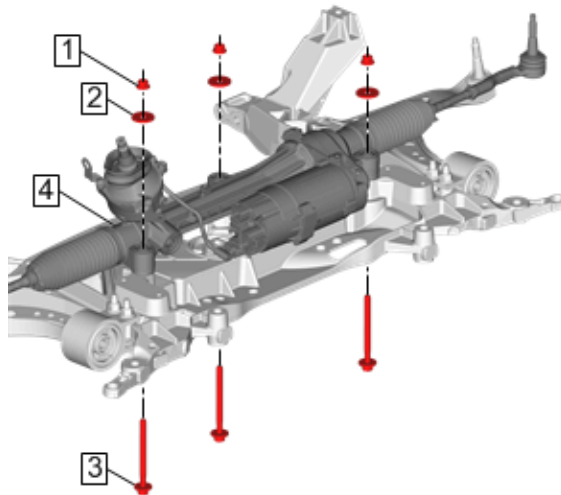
Steering Gear, Nuts, Washers And Bolts
